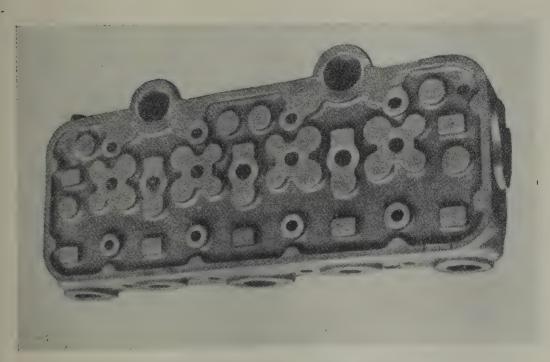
DIESEL ENGINE CYLINDER HEAD, CAST IN S.G. IRON (Courtesy: Fonderia Guido Glissenti Fu Francesco, Italy)
